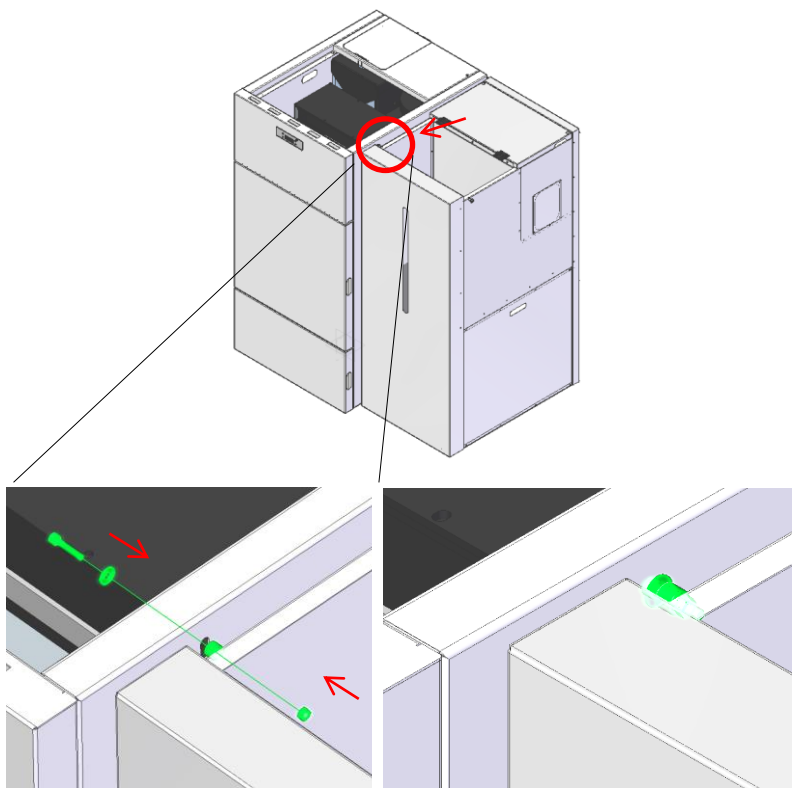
Attaching and securing the storage unit to the boiler – Side view
